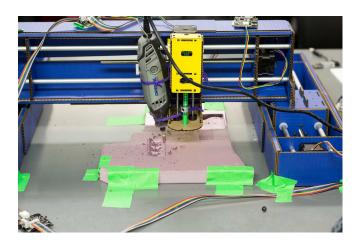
In the spirit of rapid prototyping of rapid prototyping machines, these users first built a pen plotter such as the one in Figure 10, but then quickly decided they actually wanted to build a foam milling machine, and make a few quick modifications accordingly.
